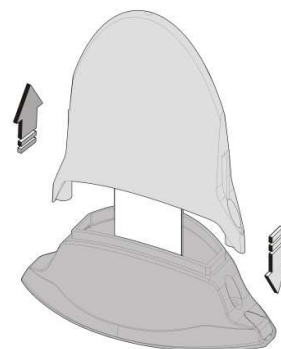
Removal and Attachment of the SFL Top Cover
